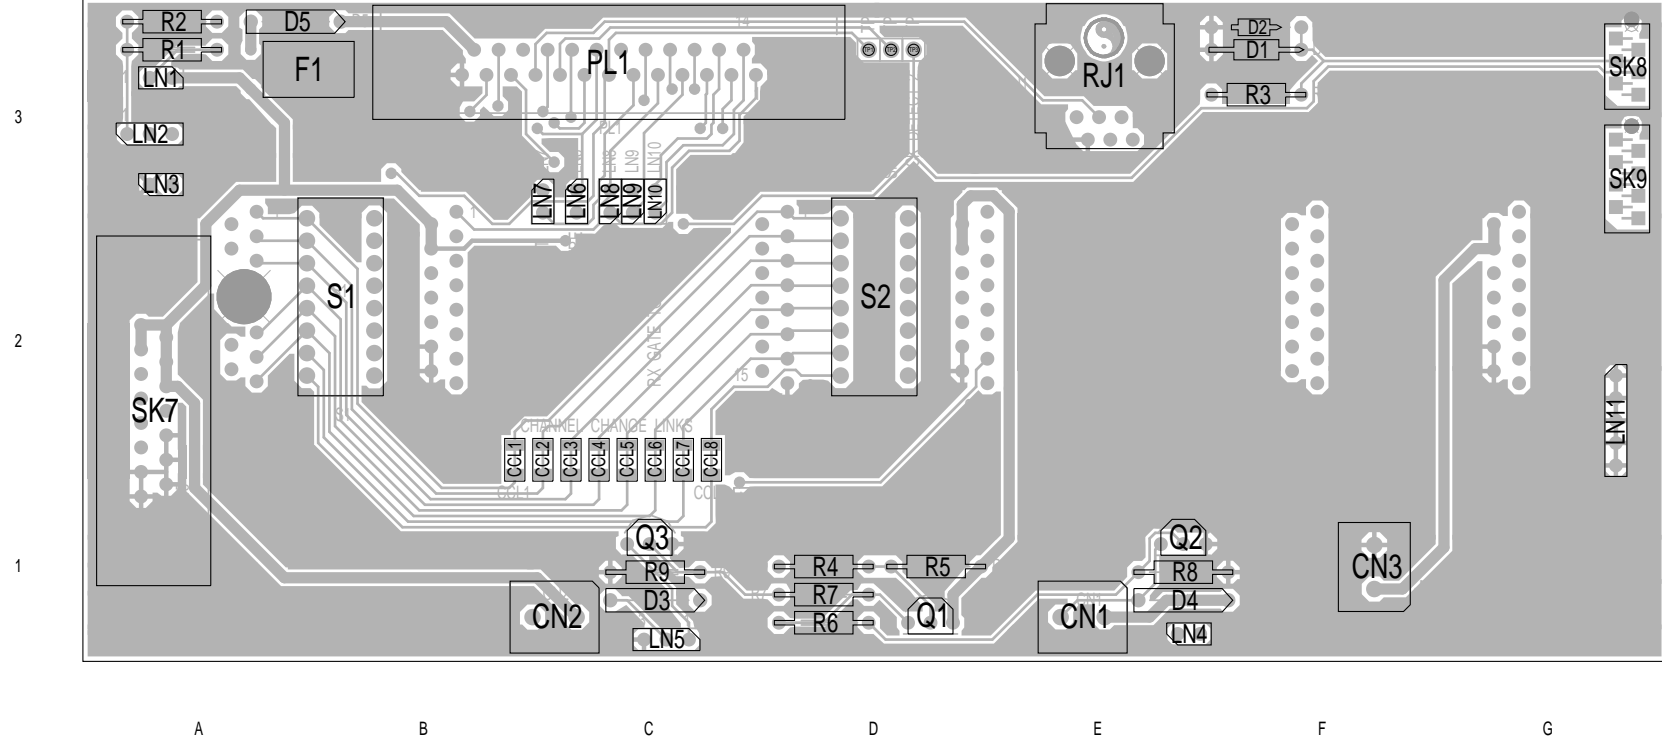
T800-55-0000 PCB Layout - Top Side (Outer)
